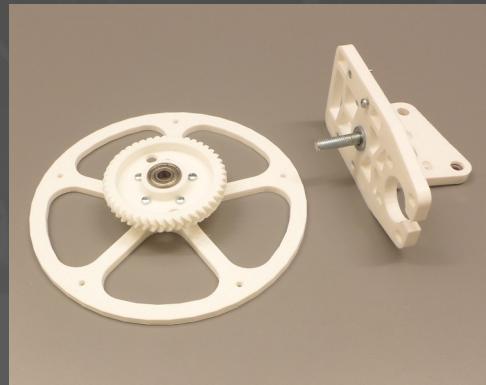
Prepare the assembly of base and bottom plate with the M8 bolt and a washer.
